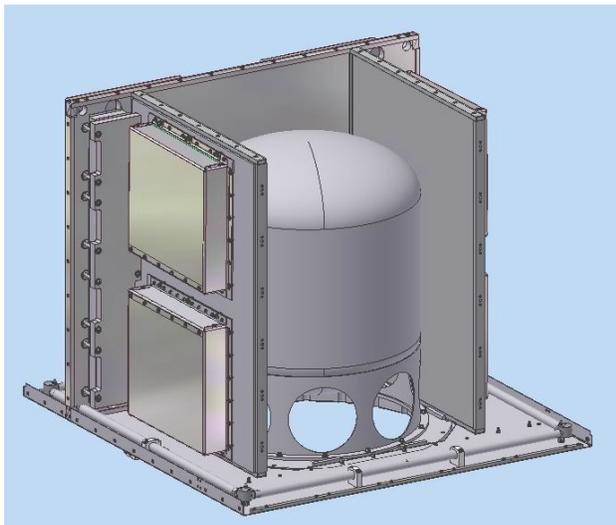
Partial assembly of Eagle, showing a Li-Ion cell unit on left side
